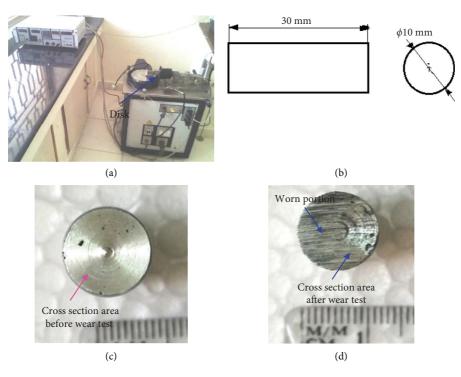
(a) Pin-on-disc apparatus; (b) wear test specimen design; (c) before wear test; (d) after wear test.
